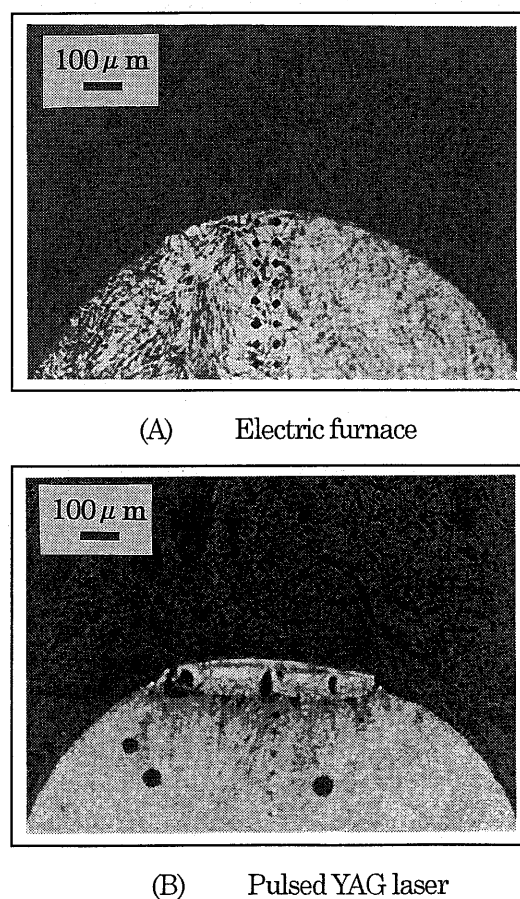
Microphotographs of the weld metal at the upper part after heat treatment.
